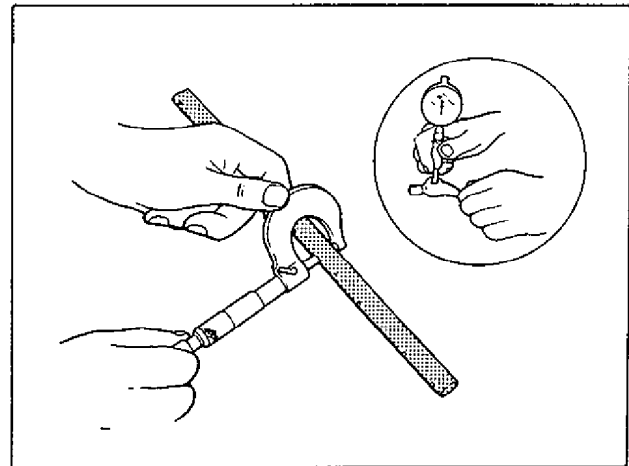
A-64 Measuring Shaft Dia. and Arm I.D.
